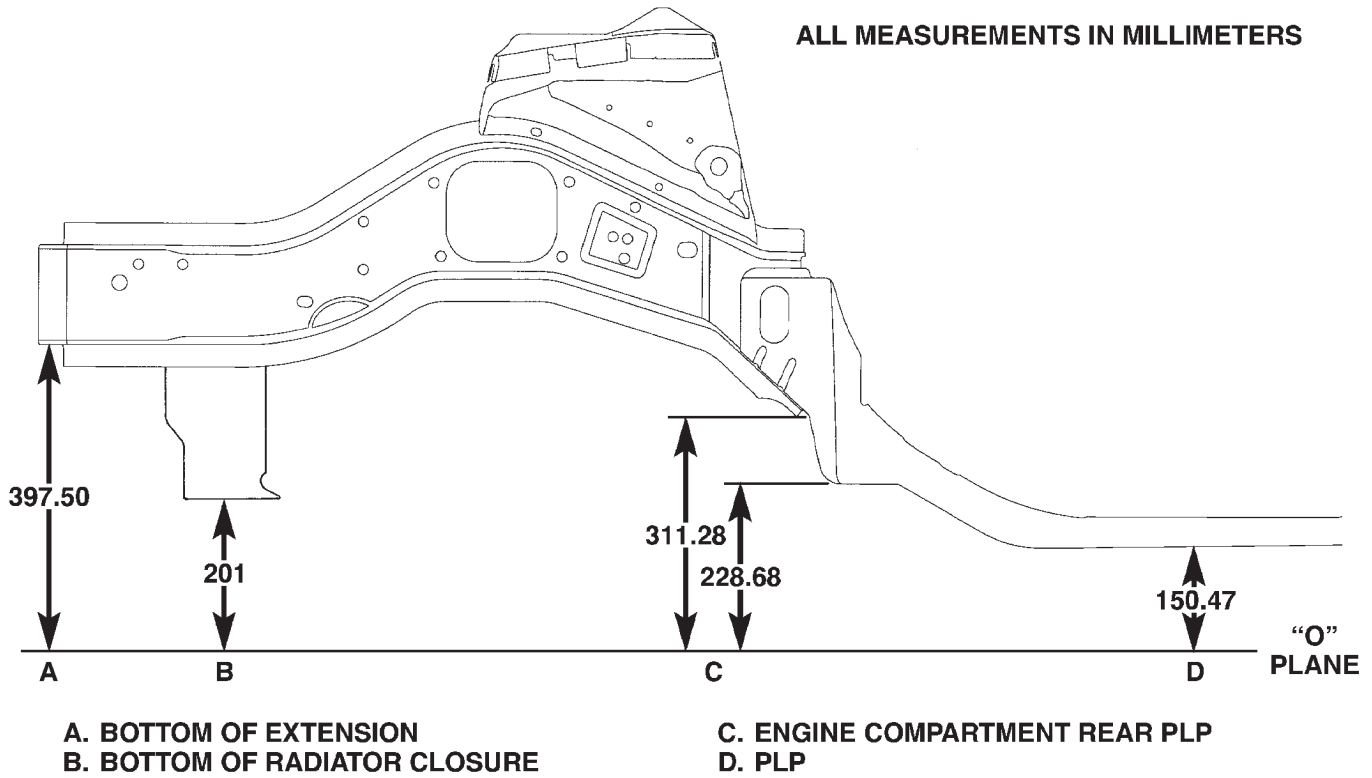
ENGINE COMPARTMENT SIDE VIEW
